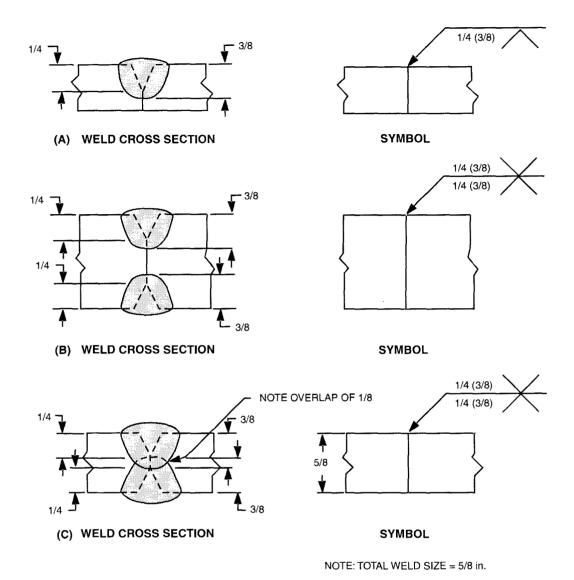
Specification of Groove Weld Size and Depth of Bevel
